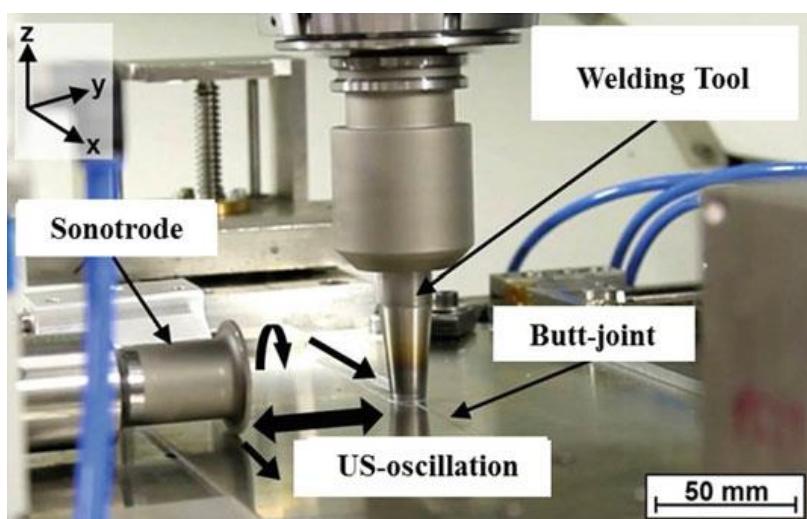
Welding by use of USE-FSW hybrid technology [3-21]
